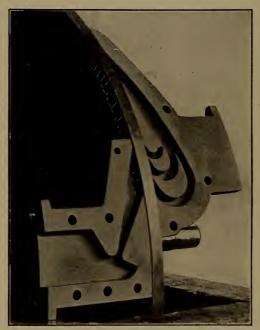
Construction of Nozzle and Reversing Chamber of Westinghouse Re-Entry Type Impulse Turbine Courtesy of Westinghouse Machine Company, East Pittsburgh, Pennsylvania
